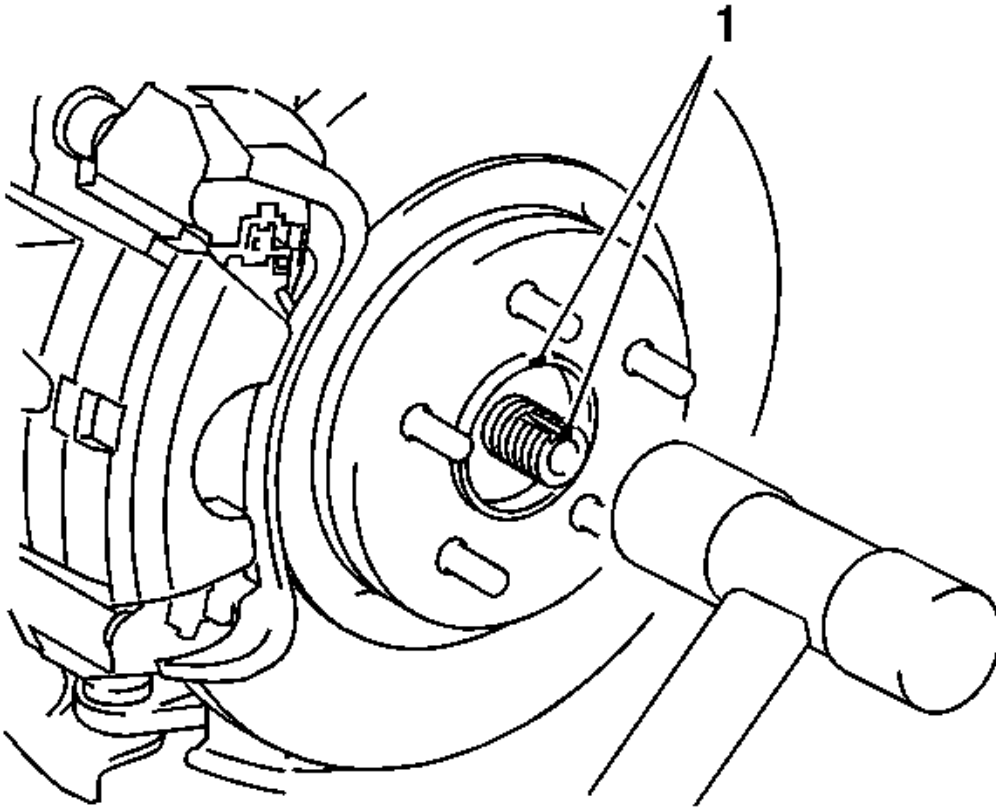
Identifying Axle Hub & Drive Shaft Matchmarks
